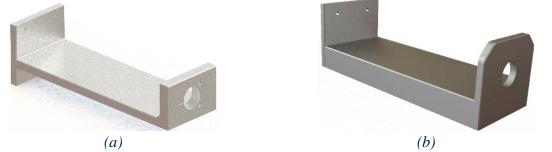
(a)Preliminary design of the support fixture (made out of aluminum), (b) Optimized design of the support fixture
